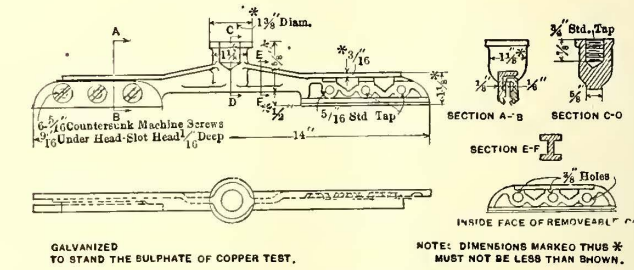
B—Composition Feed-in Ear for Grooved Wire (Dimensions Marked Thus \* Must Not Be Less than Shown)
